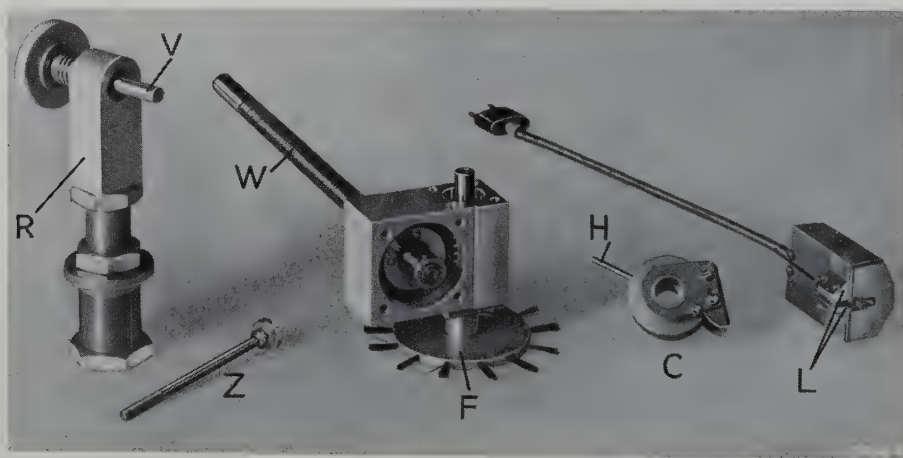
Parts of the transport arrangement. *F* flange which is set on the record to be cut; *Z* setting screw; *W* screw shaft which *via* a worm and pinion (visible in the opened housing) is driven by the motor axle. *C* bridge which carries the recorder (extreme right) and which is transported by the screw shaft *W* by means of a half nut (visible through the hole). The nut is pressed by a spring (*Q* in fig. 2) into the screw of the shaft *W*, it can however be lifted by means of the lever *H* in order to be able to move the bridge freely along *W*. *V* the pin which is screwed into the support *R* and forms the outermost bearing of the shaft *W*.
